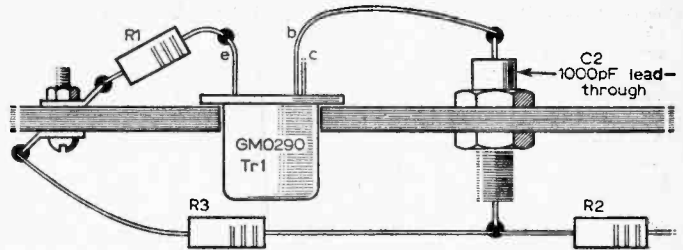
Details of mounting transistor GM0290 with shortest possible leads.
